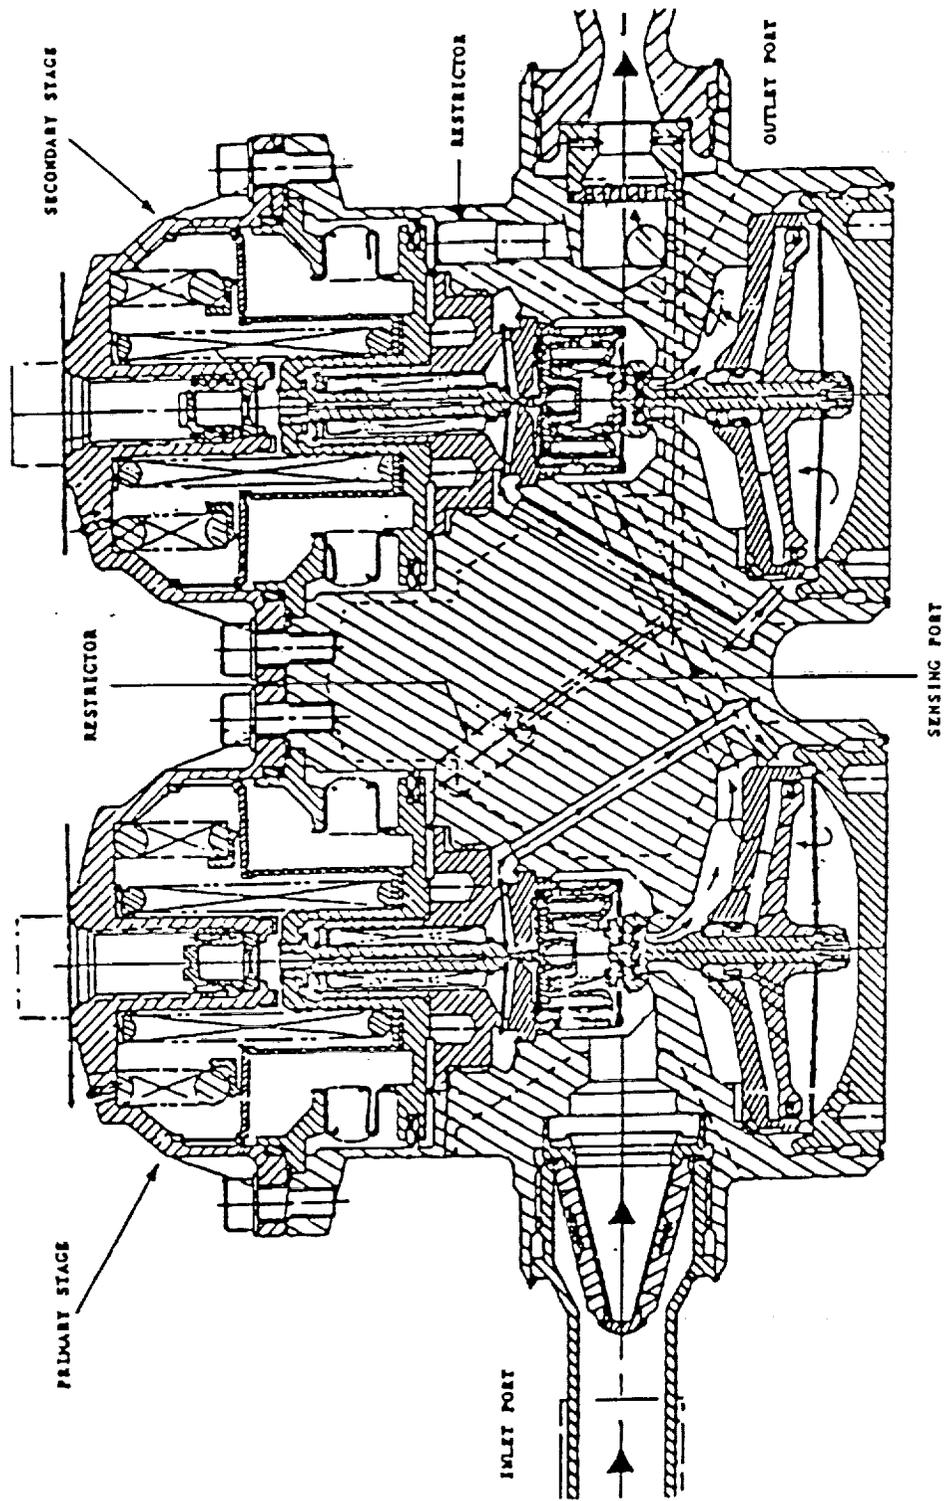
HELIUM PRESSURE REGULATOR ASSEMBLY
